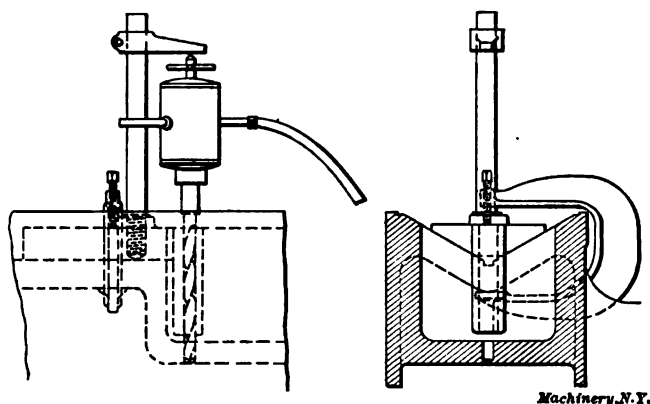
Combination Drill Jig and "Old Man" for Drilling Hole in Oil Pockets for Oiling Device. Jig insures Hole being drilled in Center of Way
